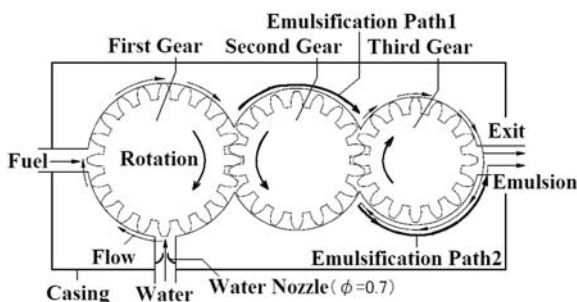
The scheme of top view of mechanical emulsifier (3 Gears type) used in this study.
